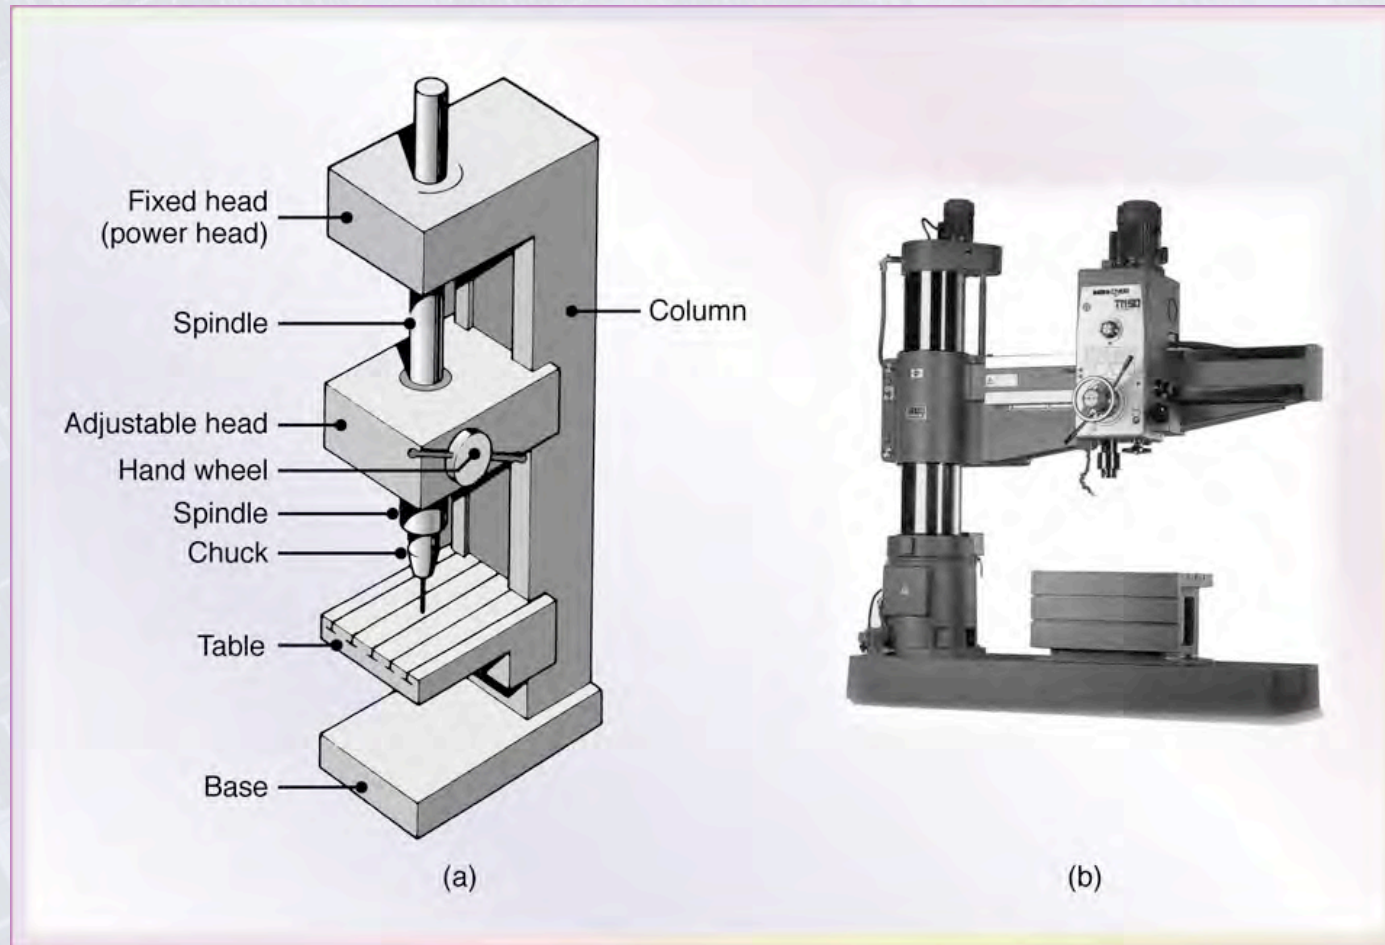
(a) Schematic illustration of the components of a vertical drill press. (b) A radial drilling machine. *Source:* (b) Courtesy of Willis Machinery and Tools.
